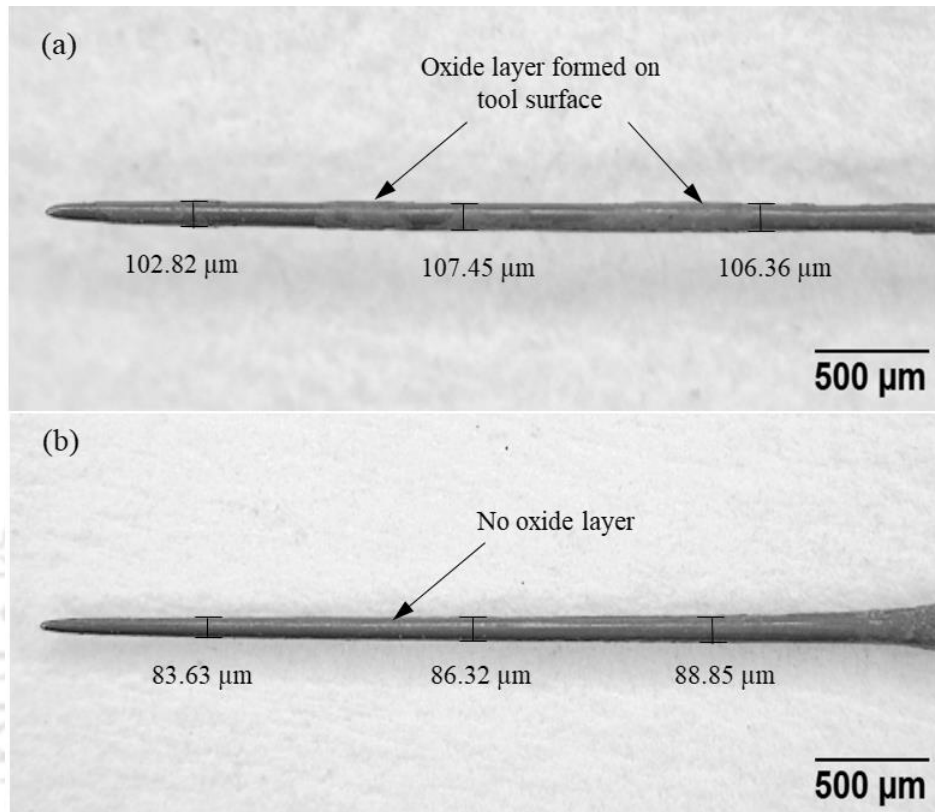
Fabricated microtools by setup 2 (a) fixed tool and (b) fixed IEG technique
